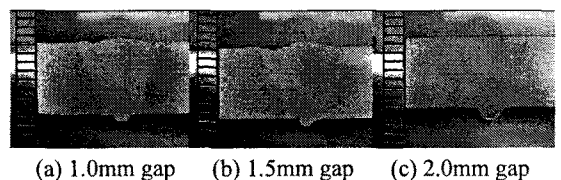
Bead shapes for laser-rotating arc hybrid welding
